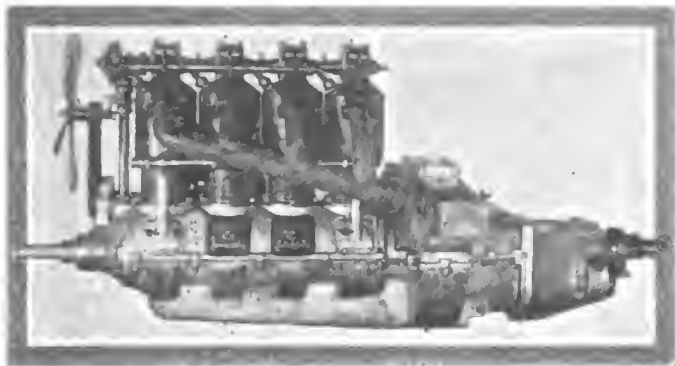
Exhaust side of Model 50 motor, showing full length of crankcase, and nicely contrived exhaust manifold
